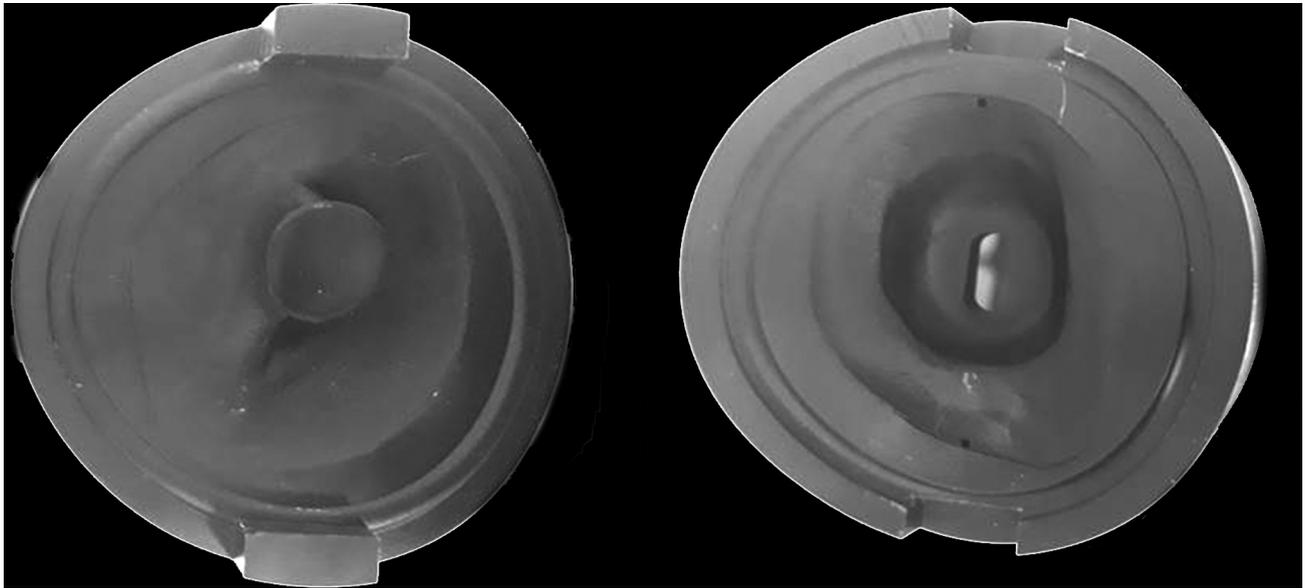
Negative mold of orbital prosthesis printed by using 3D printer.
